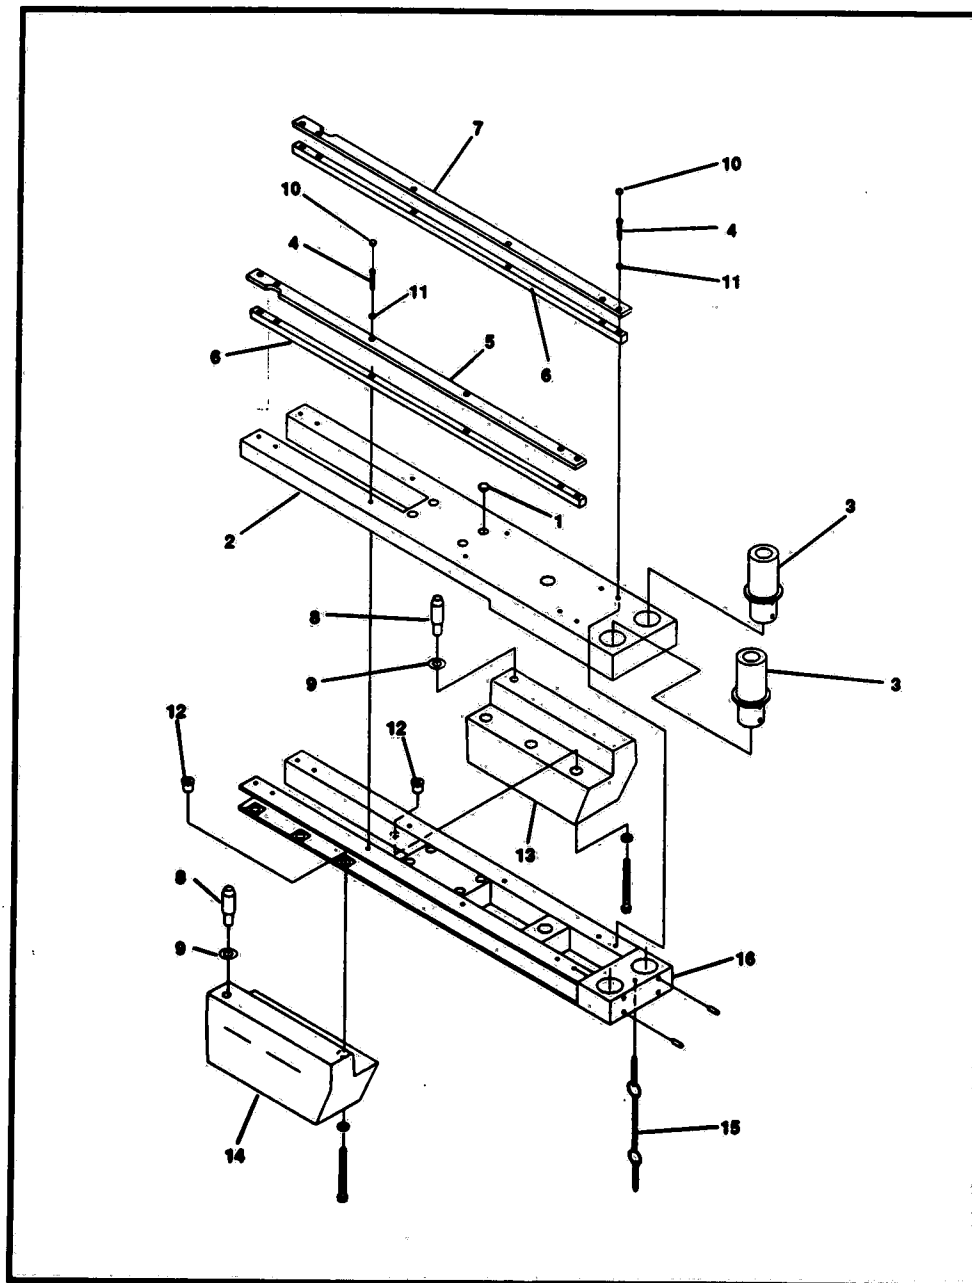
LONGITUDINAL SUPPORT ASSEMBLY.
